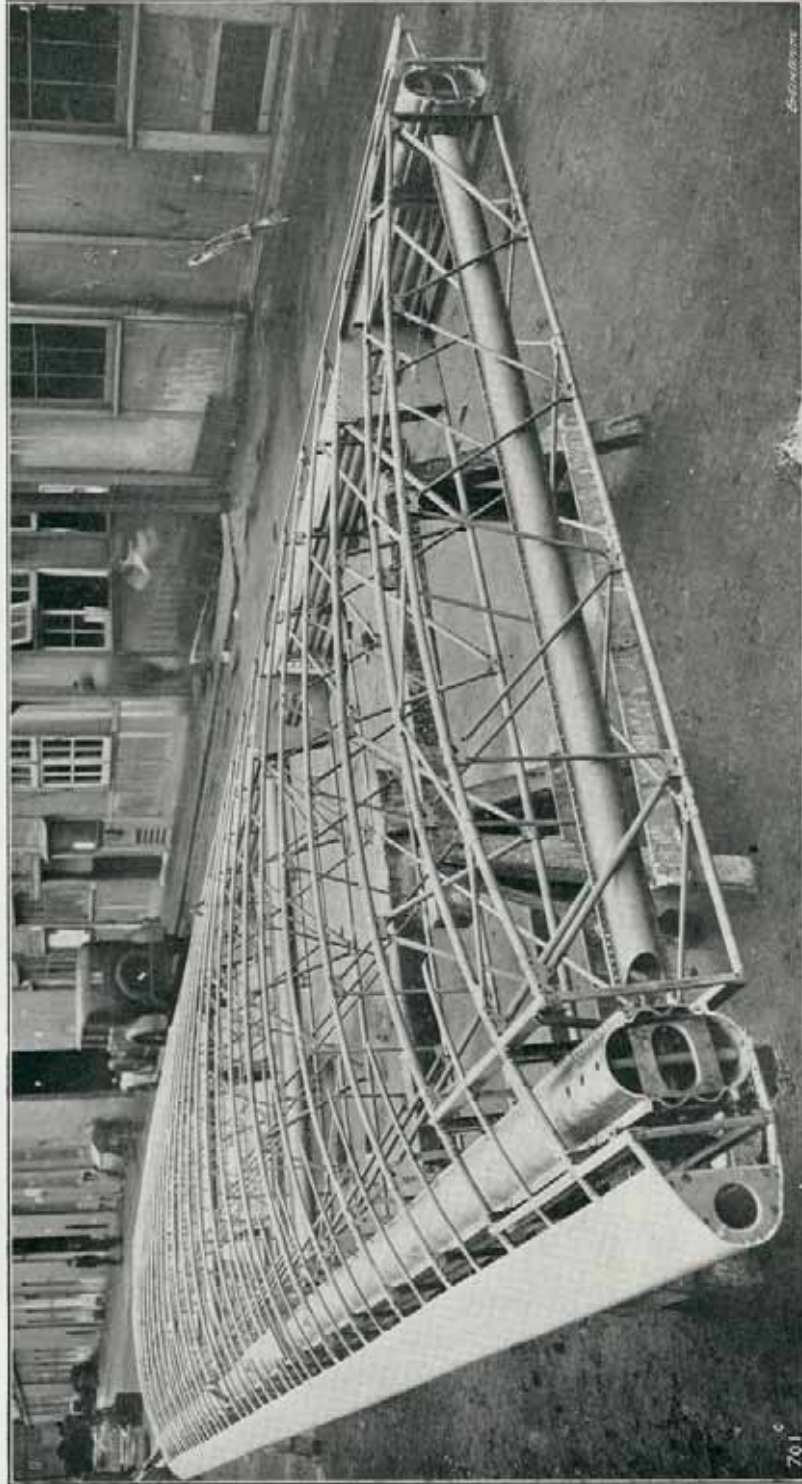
WING SECTION COMPLETED EXCEPT FOR FABRIC COVERING.
